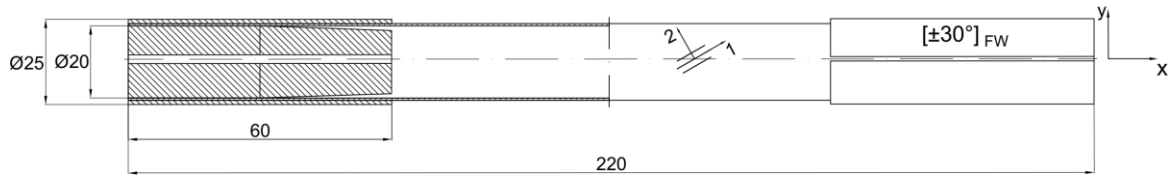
Dimensions of the test specimen used for experimental multiaxial fatigue characterization
